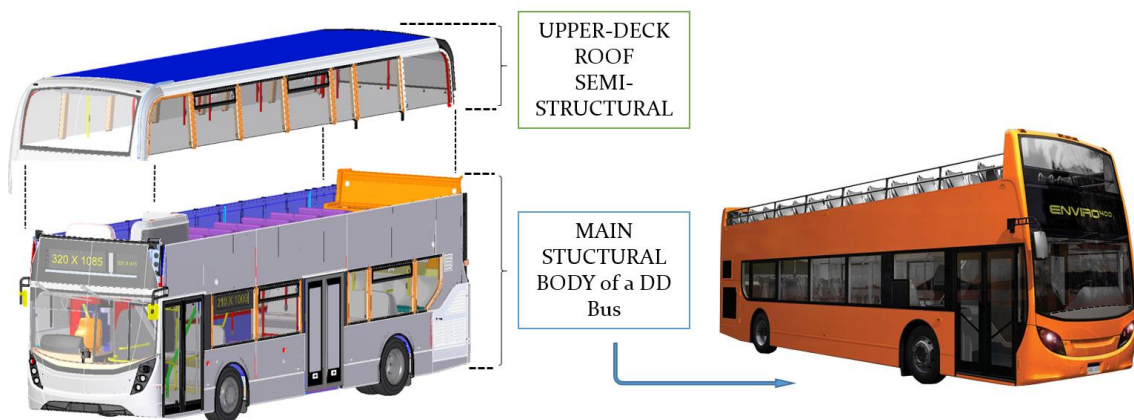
II: Left: Definition of the upper-deck roof structure. Right: The Enviro400 open-top bus requires no additional reinforcement of the main structural body following the removal of the upper-deck roof structure.
